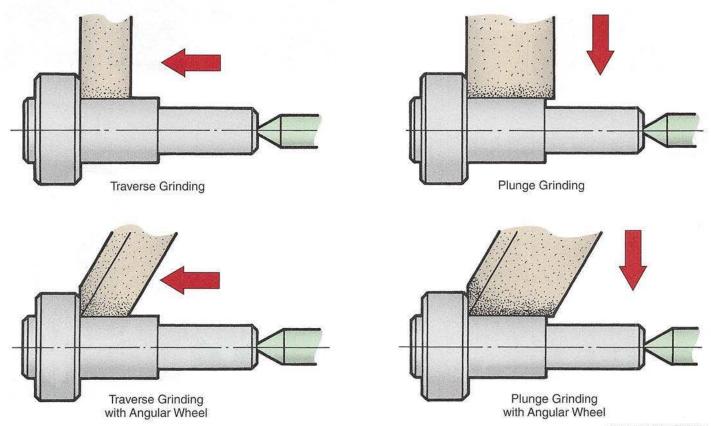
Grinding to a shoulder using traverse and plunge grinding techniques.
